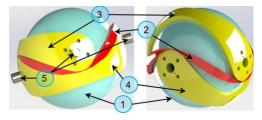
Element joint. Inside detail. 1-spherical inner shirt; 2-frontier of fluid ER; 3-mobile element no.1 (exterior element); 4-mobile element no.2 (exterior element); 5-cylindrical joints
